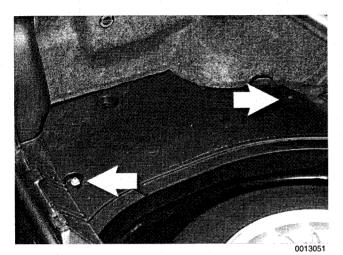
Insert tool through rear bumper mount bores to remove mounting bolts (right side shown).
